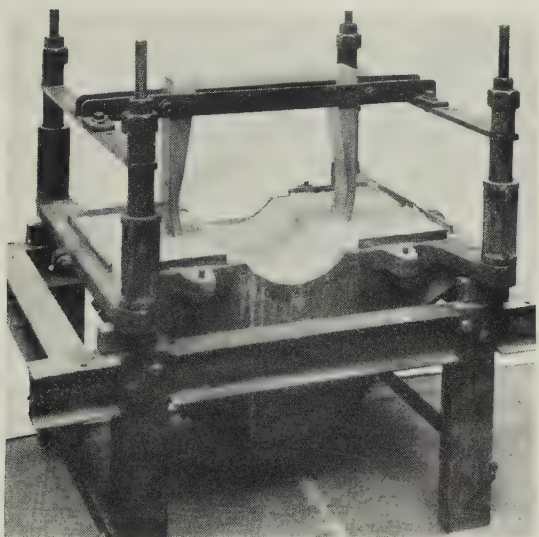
Ramming of Lower Part of Furnace Casing Completed and Lining Cut Away to Accommodate Primary Coil Former.
